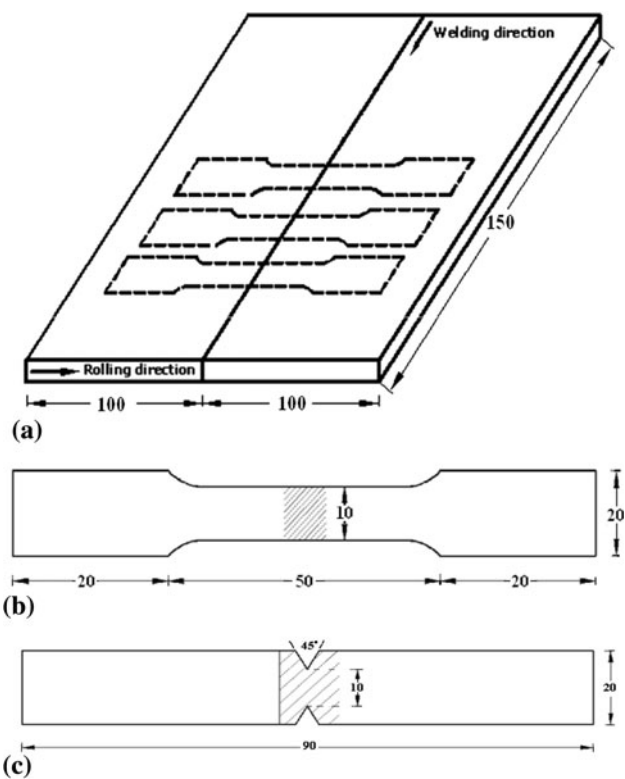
Dimensions of joint and tensile specimens. (a) Scheme of extraction of tensile specimen. (b) Dimensions of un-notched tensile specimen. (c) Dimensions of notched tensile specimen
